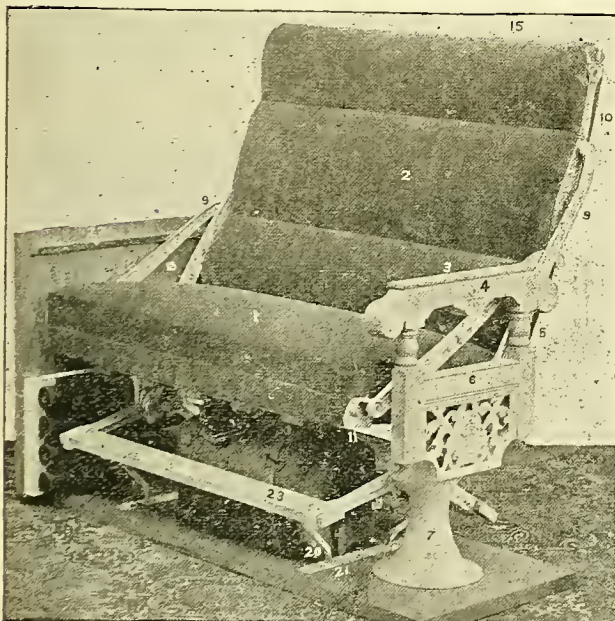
EXTRA-HIGH-BACK SEAT.
